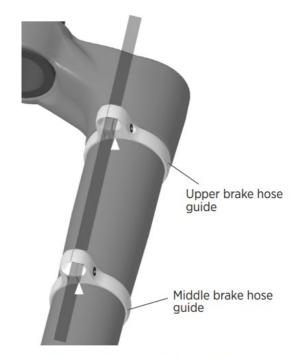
Full view of brake hose routing through brake hose guides and into mast
